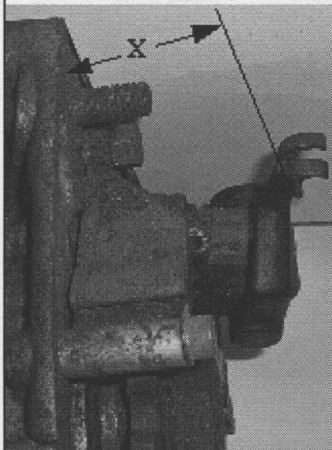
Figure D - new style bearing plate showing measurement "X" (53mm) on engine.
